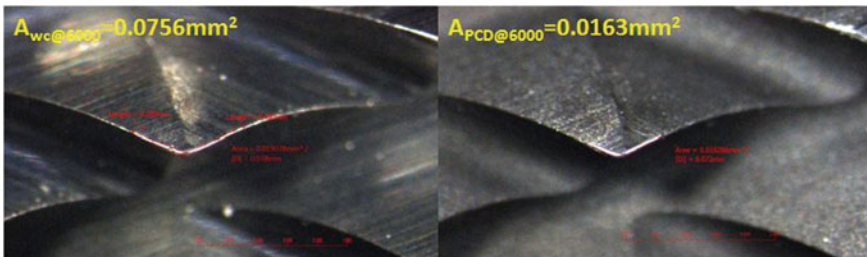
Flank wear of solid carbide tools with and without PCD coating
